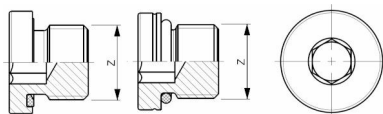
VSTI screw plugs with ED seal (left), with o-ring (right)
